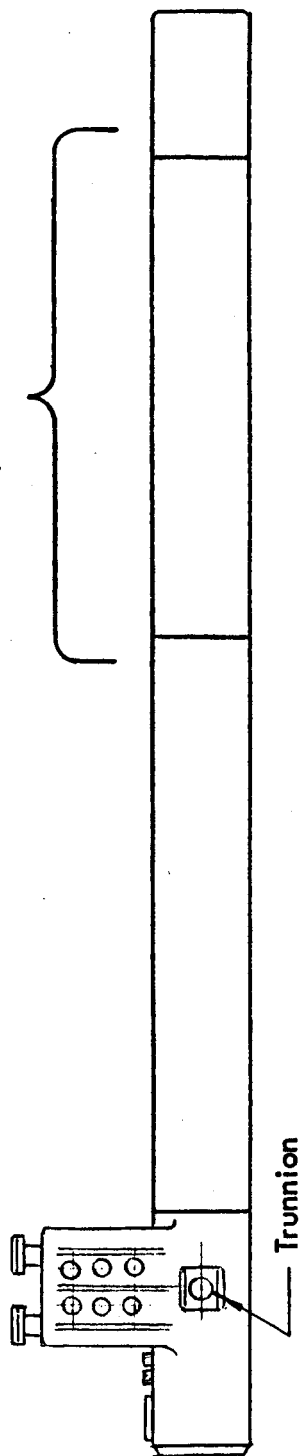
TENSILE TEST LOOP ASSEMBLY
